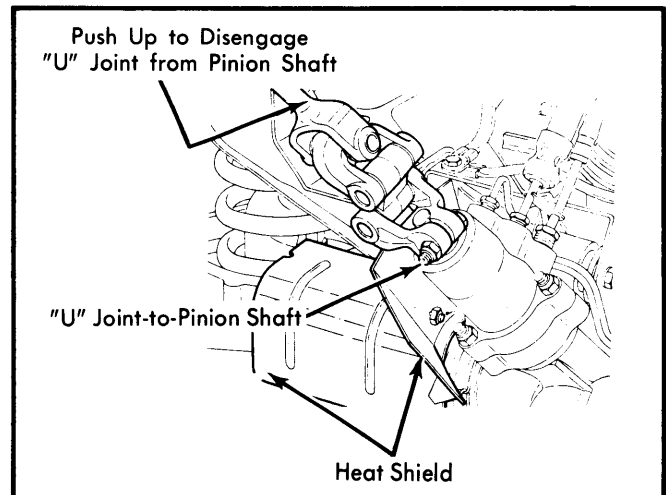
Disconnecting Lower Steering Column from Pinion Shaft
